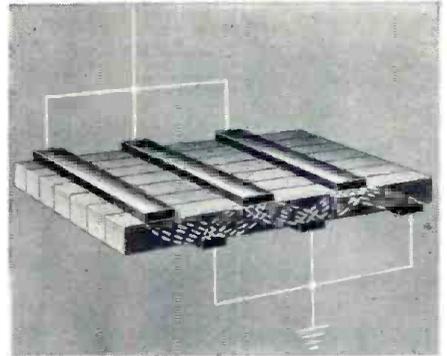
Staggered arrangement of electrodes used for edge gluing. In this way, wide panels can be built up from narrow stock.
